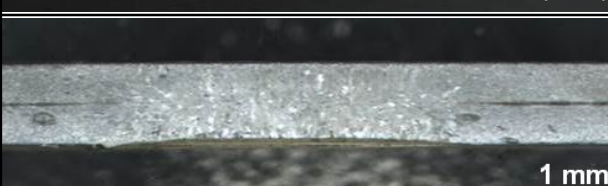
Indentation depth of spot welding with electrode tip diameter (1.2t)
